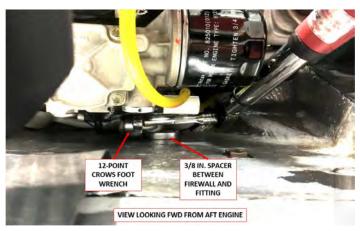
ENGINE OIL RETURN LINE FITTING TORQUEING EXAMPLE
